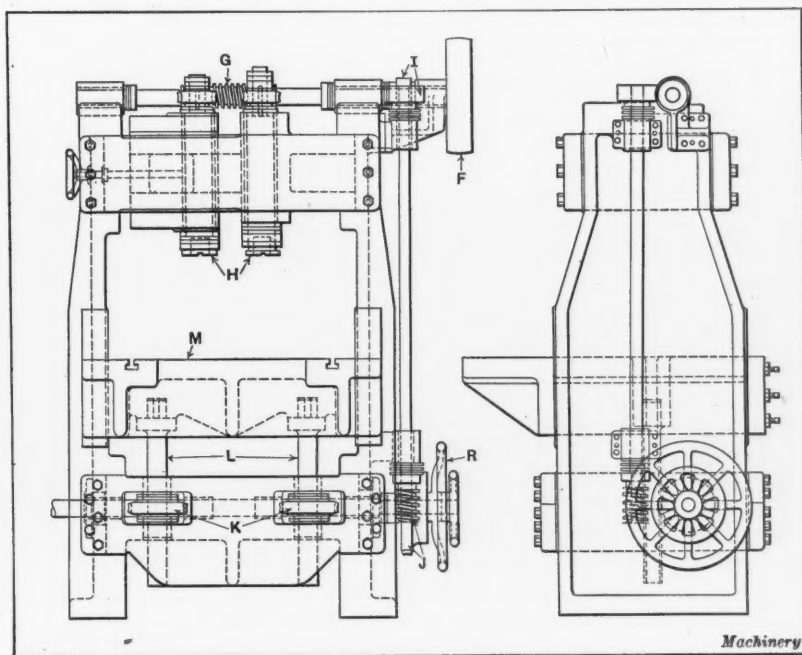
Arrangement of Mechanism on the Special Cylinder Head Boring Machine illustrated in Figs. 6 and 7
